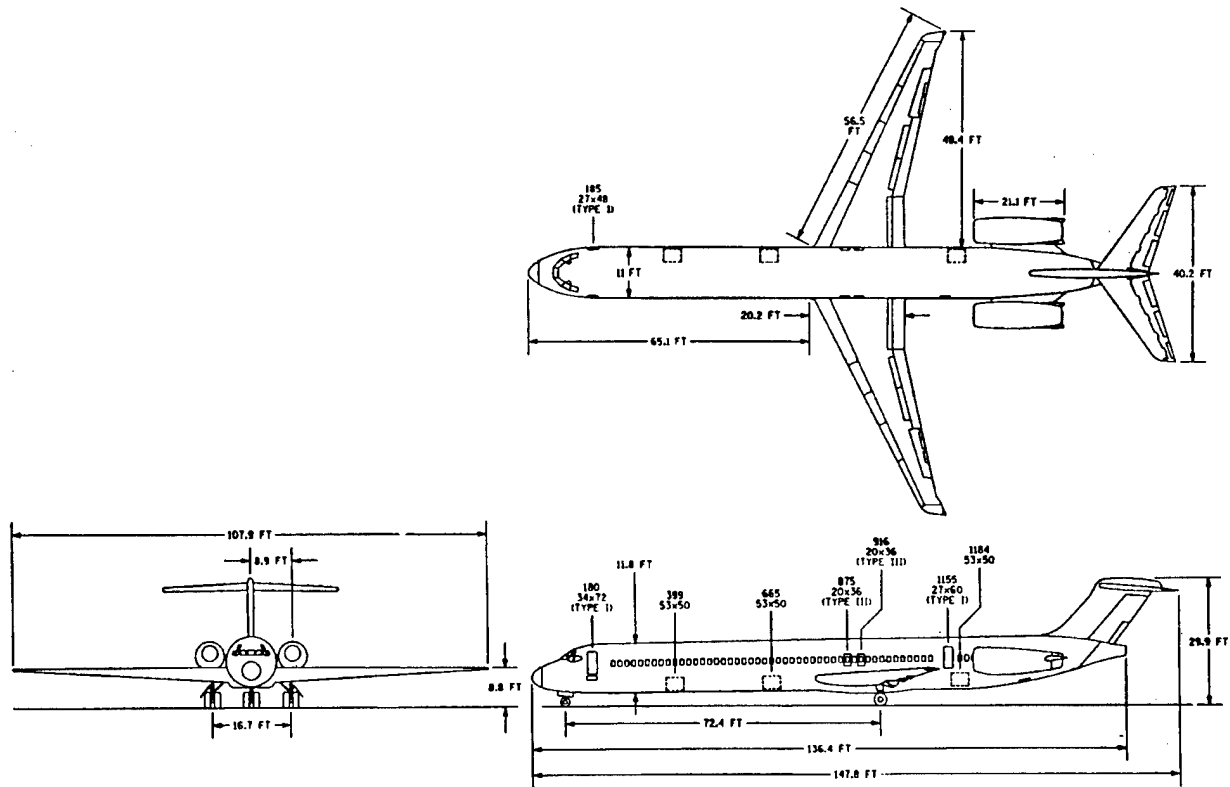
MD-82/83 THREE-VIEW DRAWING
